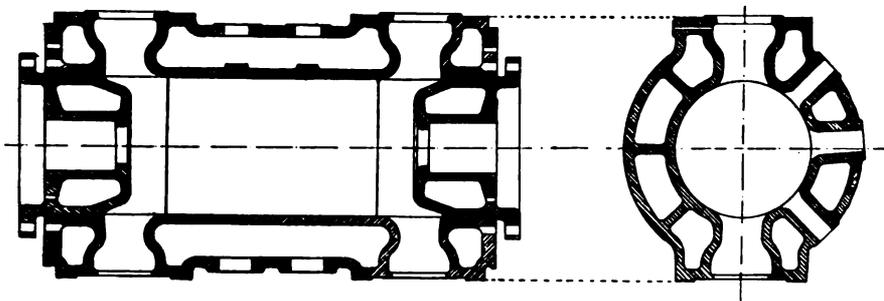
Section of Cylinder, Ehrhardt & Sehmer.
